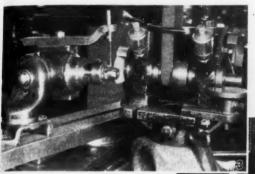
Grinding a multiple-diameter cutter. Special gages insure that the correct step will be maintained. Fig. 4—Grinding a large, inserted-blade face-milling cutter, used for milling aluminum crankcases.
